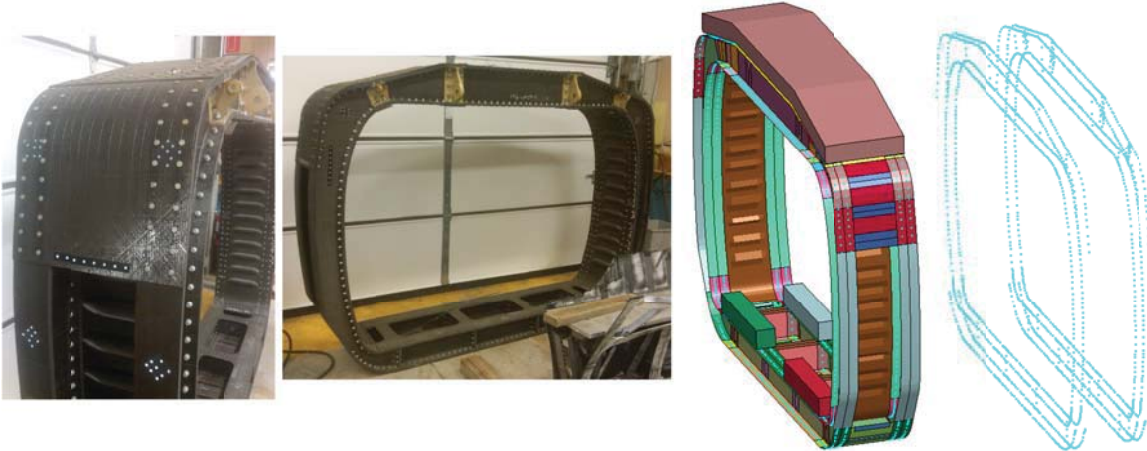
Fastener and nodal mass locations on the framed fuselage section.
